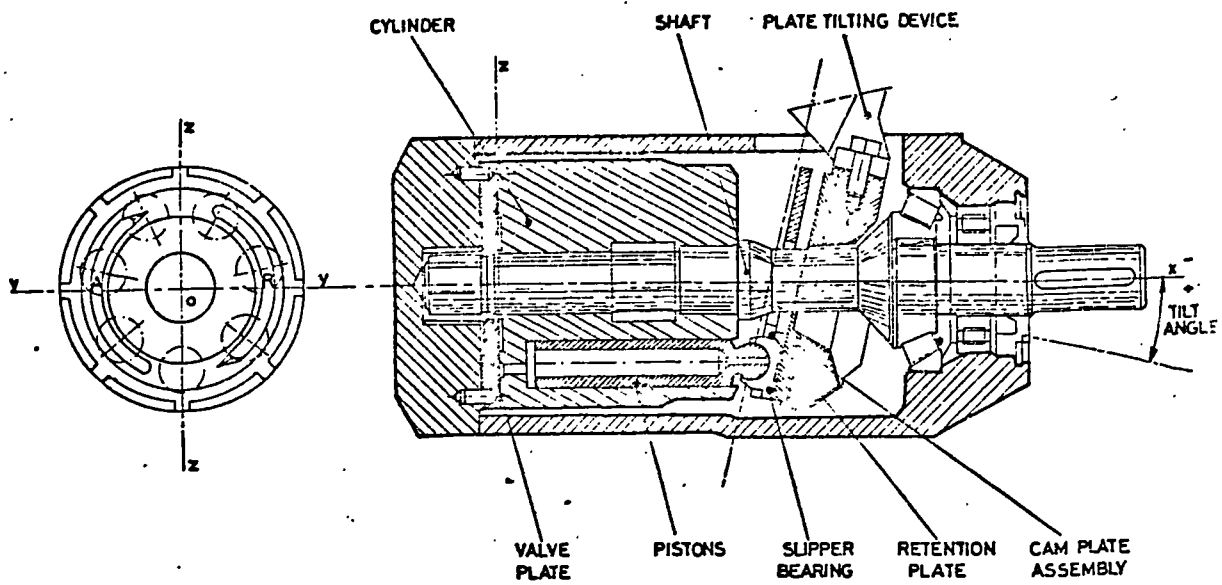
AXIAL PISTON PUMP DESIGN TO UTILISE A 'STIFF' SHAFT
